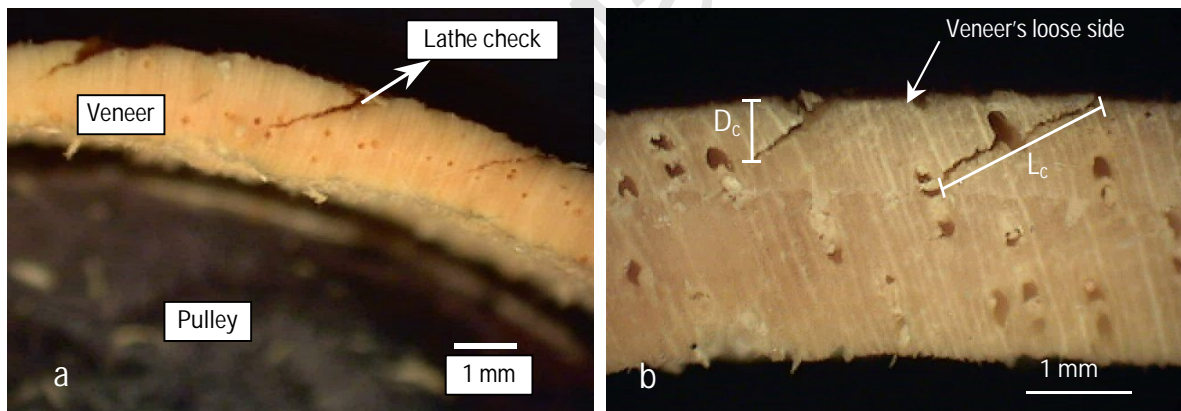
Arched veneer presenting the lathe checks (a), and diagram for the lathe checks measurement (b)
